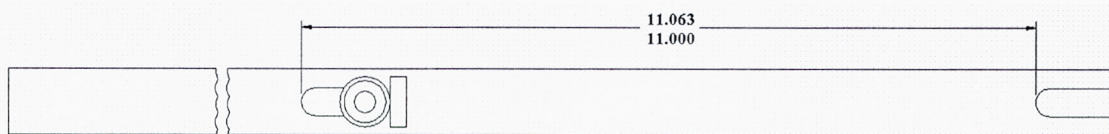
Keyway dimensions – typical for low and high beam assemblies
